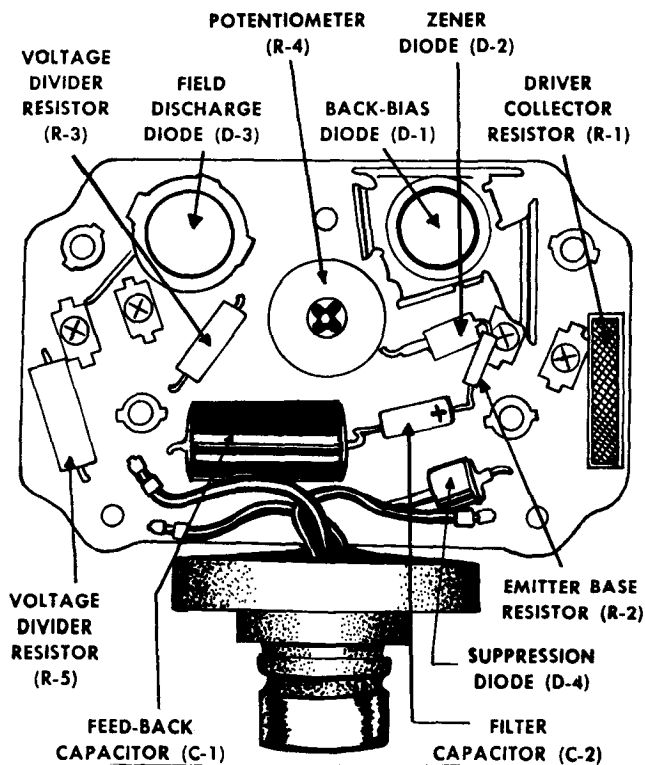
Identification of component parts (Parts keyed to Figs. 3-6).
